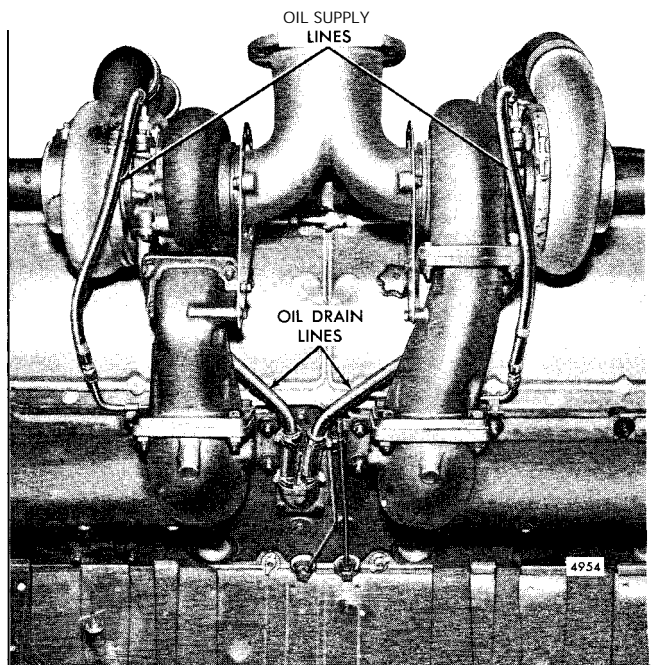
Turbocharger Oil Drain and Oil Supply Line Connections (Former Engines)
